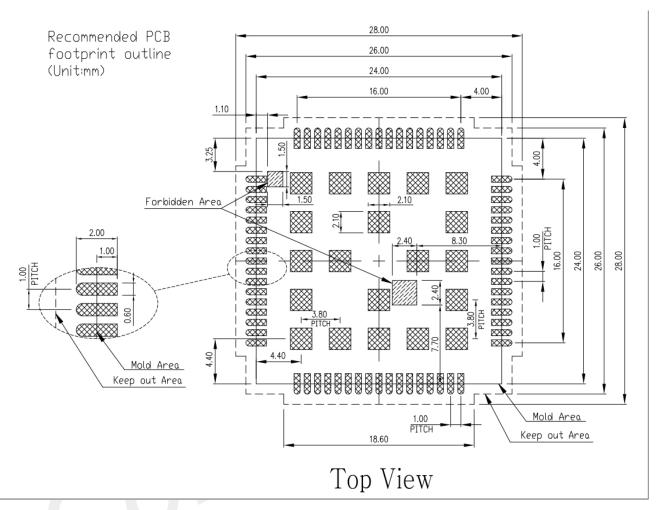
Recommended PCB footprint outline for A7670X and SIM7070X (Unit: mm)
